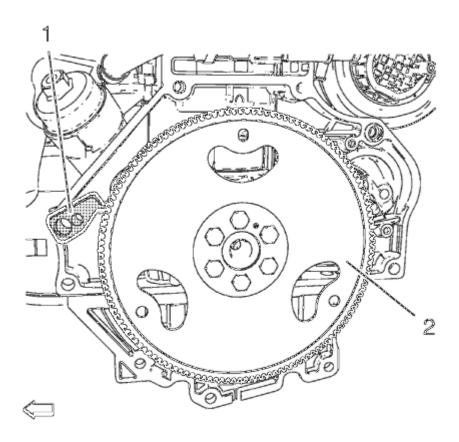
Automatic Transmission Flex Plate And Holder Courtesy of GENERAL MOTORS COMPANY
